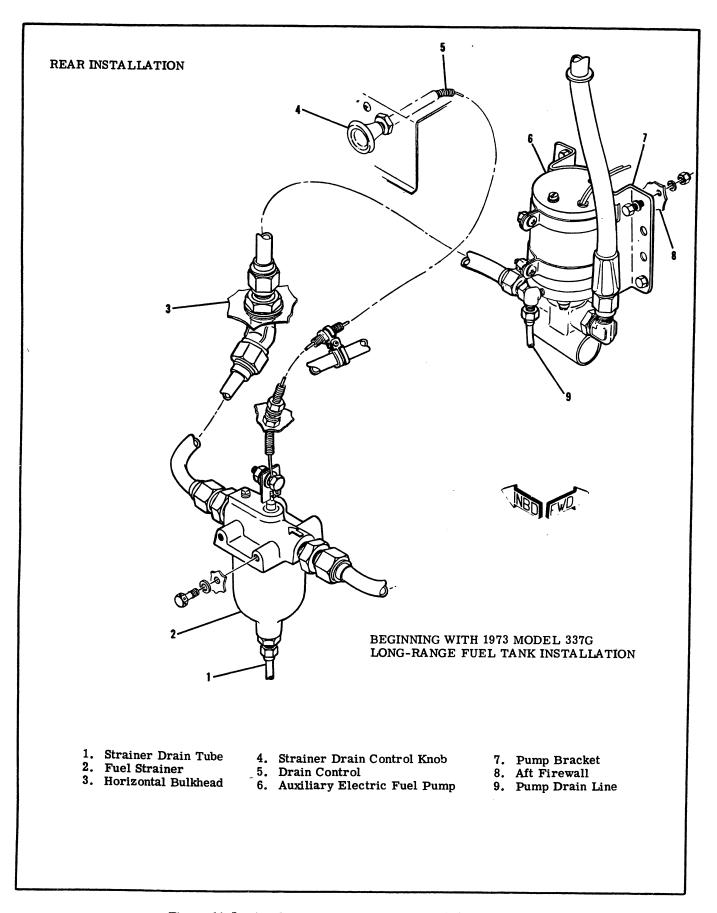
Auxiliary Fuel Pump Installation (Sheet 3 of 3)
